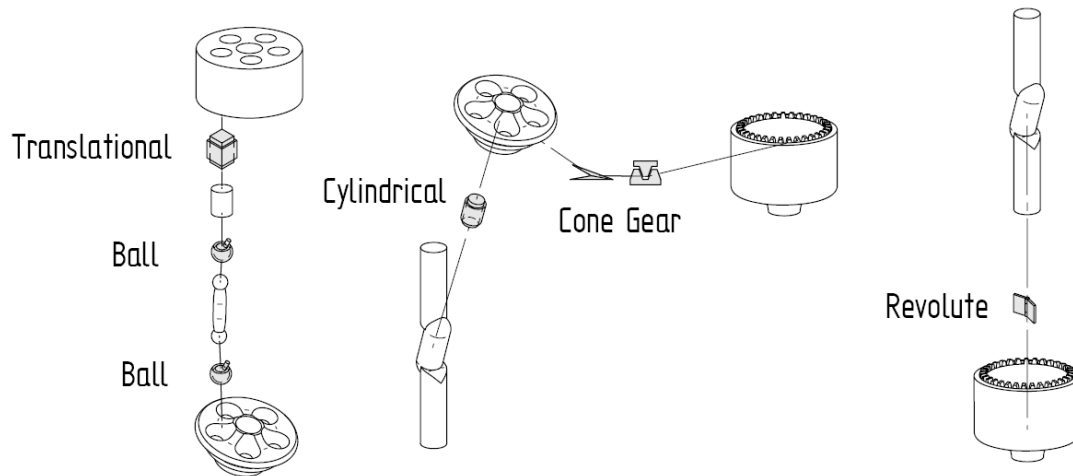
The joints connecting the integral parts of the machine; translational joint connecting cylinder head and piston, ball joint connecting the piston and piston rod, ball joint connecting the piston rod and the wobble plate, cylindrical joint connecting Z-shaft and wobble plate, cone joint connecting the wobble plate and engine block, gear joint connecting the wobble plate and engine block, revolute joint connecting the Z-shaft and engine block.
